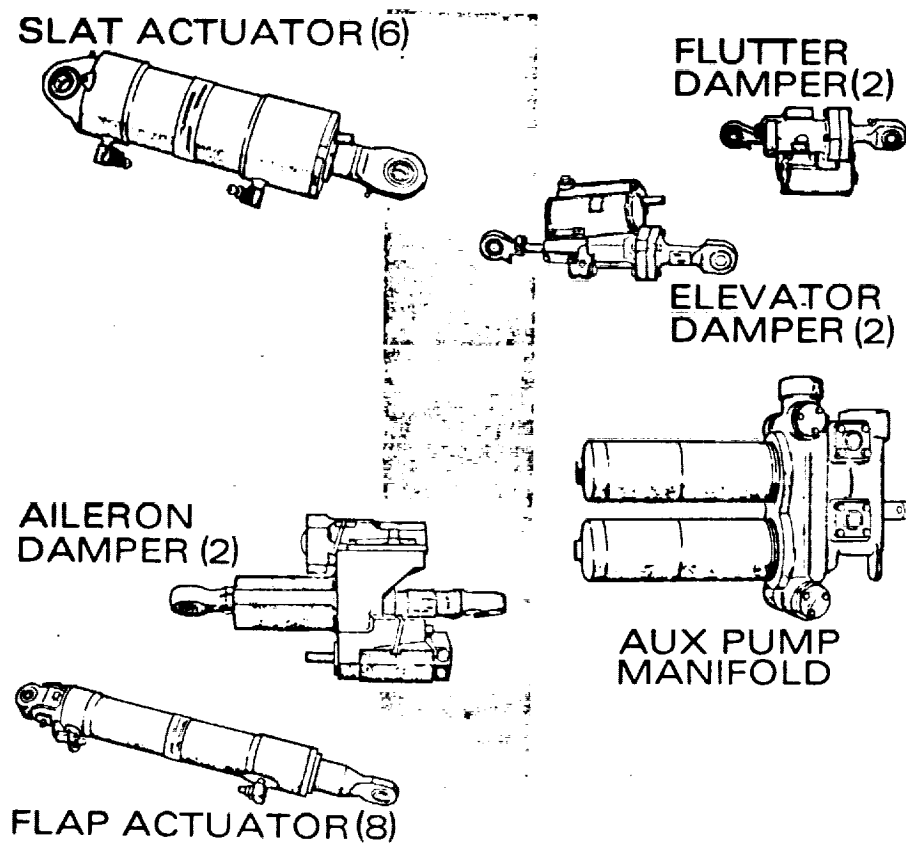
BENDIX EQUIPMENT ON DC-10
